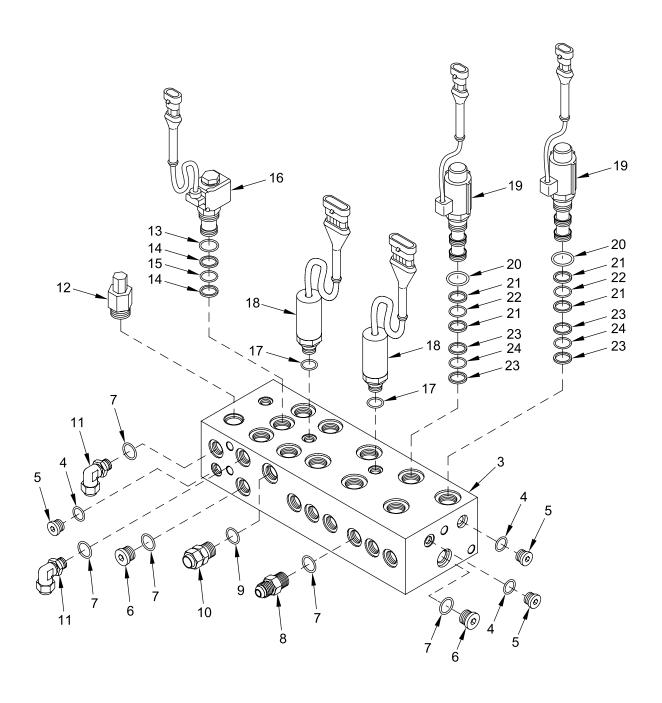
Primary Manifold Assembly, Top, Front and End View
